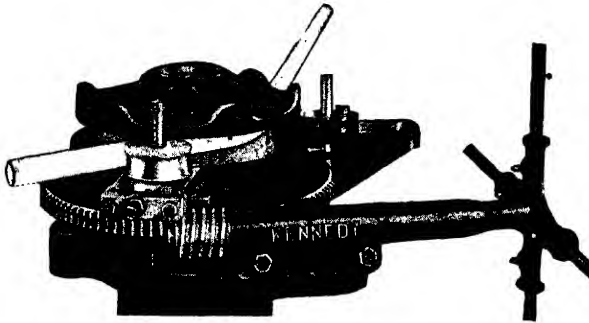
UNIVERSAL BENDER, BENDING A $1\frac{1}{2}$ -IN. STEAM PIPE
